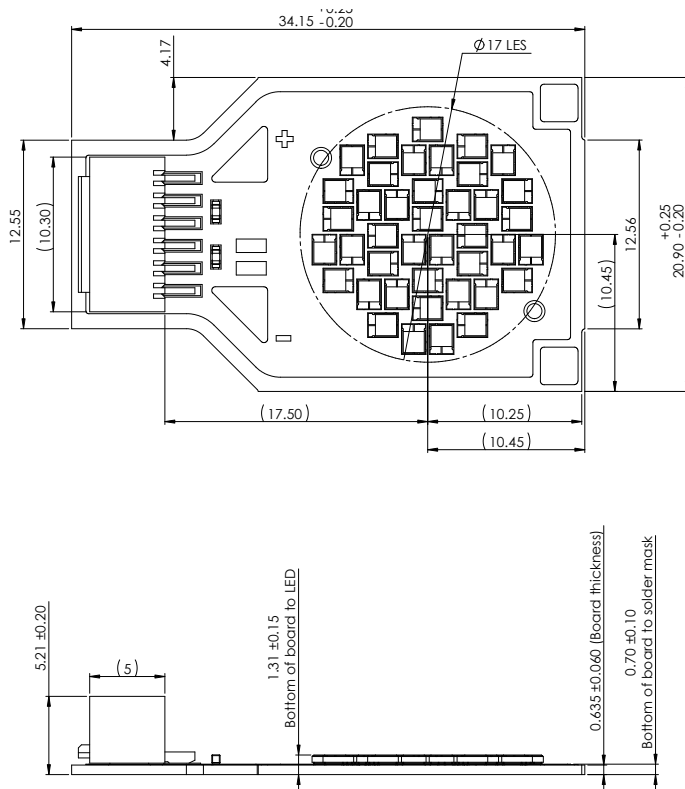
Package outline drawing for LUXEON S5000/LXSx-PWxx-0041.
